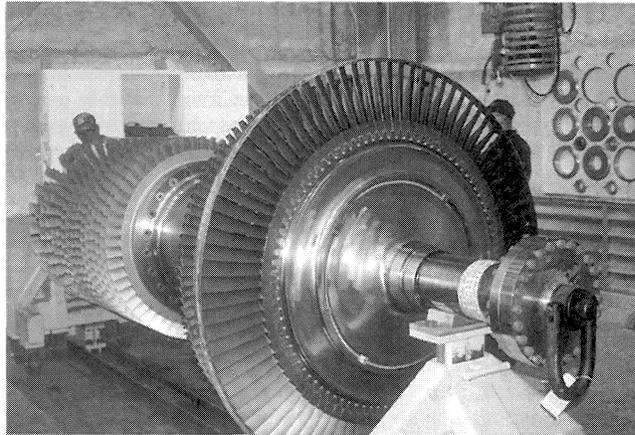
Gas Turbine Rotor Positioned in the Horizontal Position in the Rolling Pivot Block System, Ready to Be Lifted into the Vertical Position.
